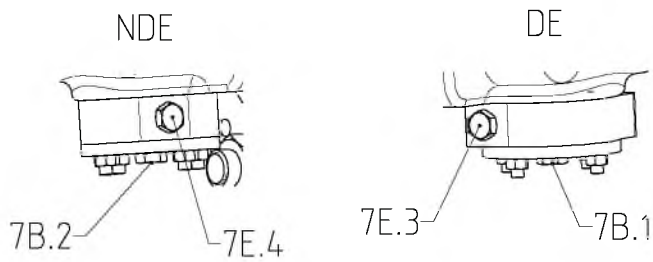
Bearing bracket connections - version with water cooling of oil ring lubrication, view X
